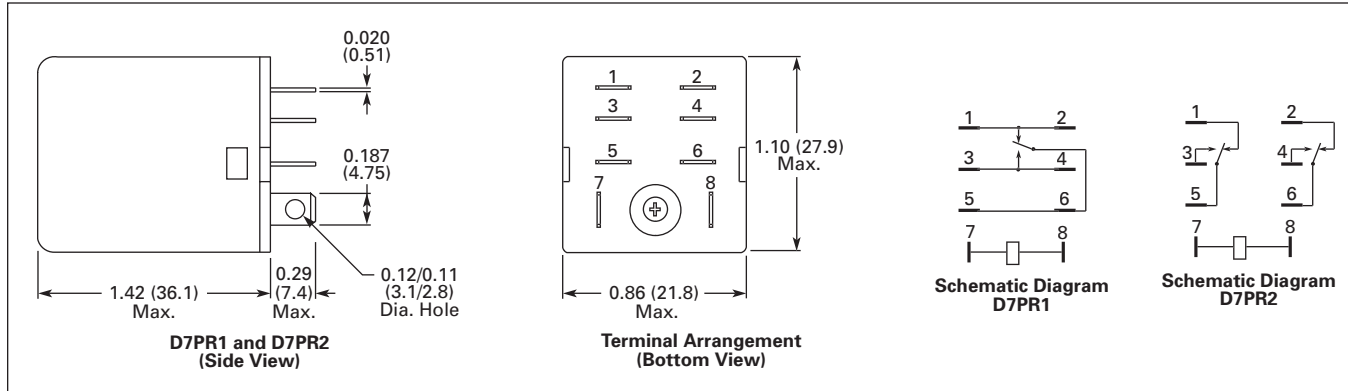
D7PR1 and D7PR2 — Approximate Dimensions in Inches (mm)
